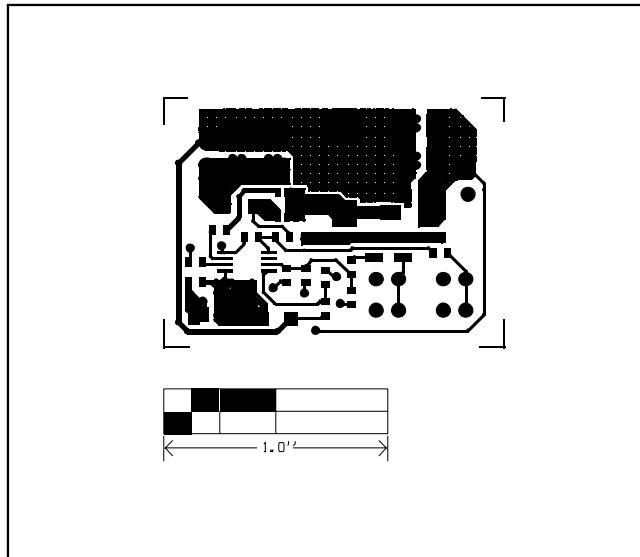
MAX16802B EV Kit PC Board Layout—Component Side
